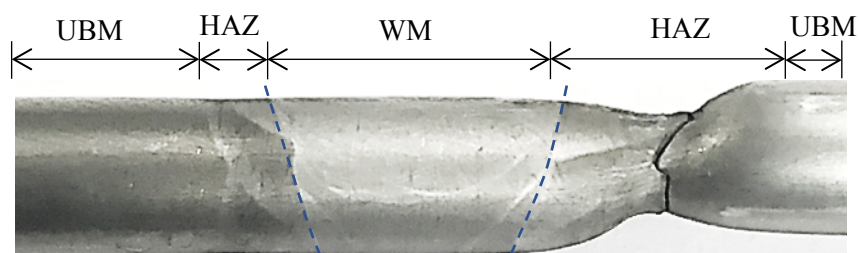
Local deformations and necking of all test coupons prior to failure
